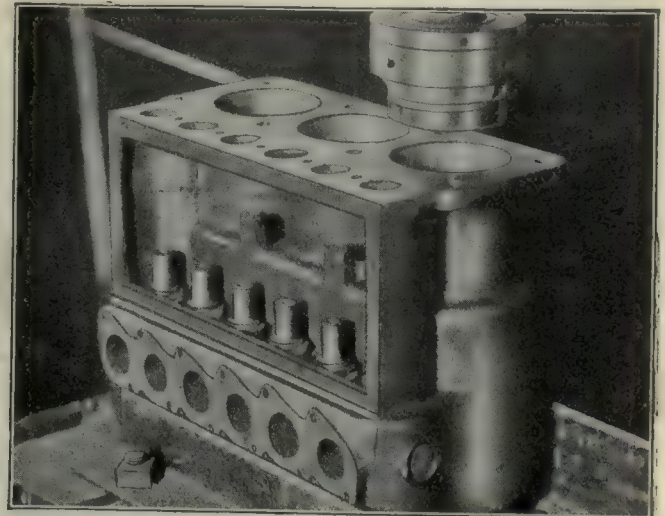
CHAMFERING LOWER END OF CYLINDER BORE
